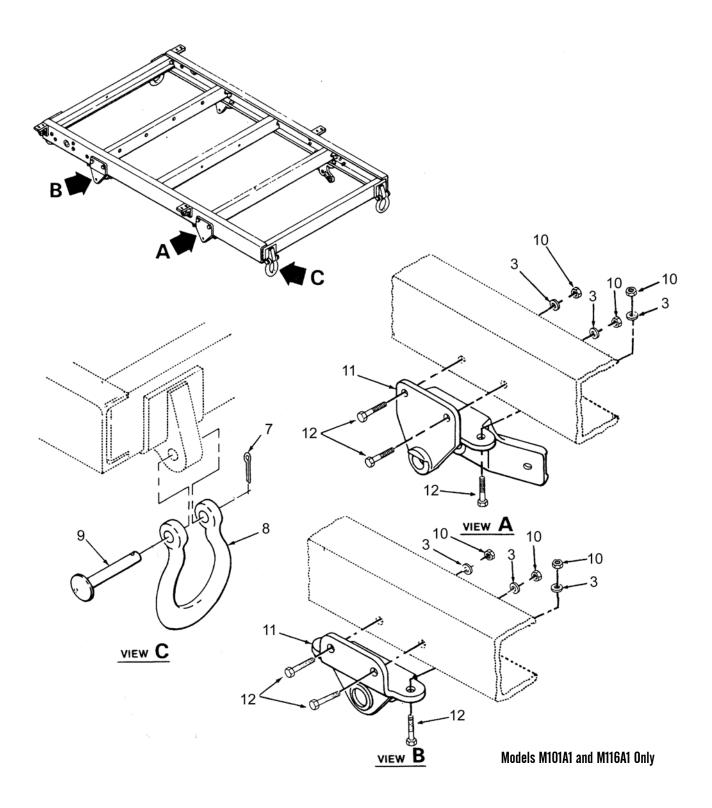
Chassis Frame Assembly (Sheet 2 of 2)
